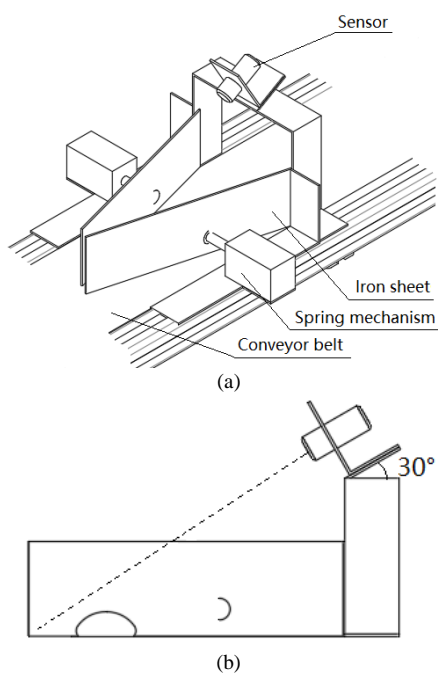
Flipping mechanism. (a) Overall structure; (b) Side view
